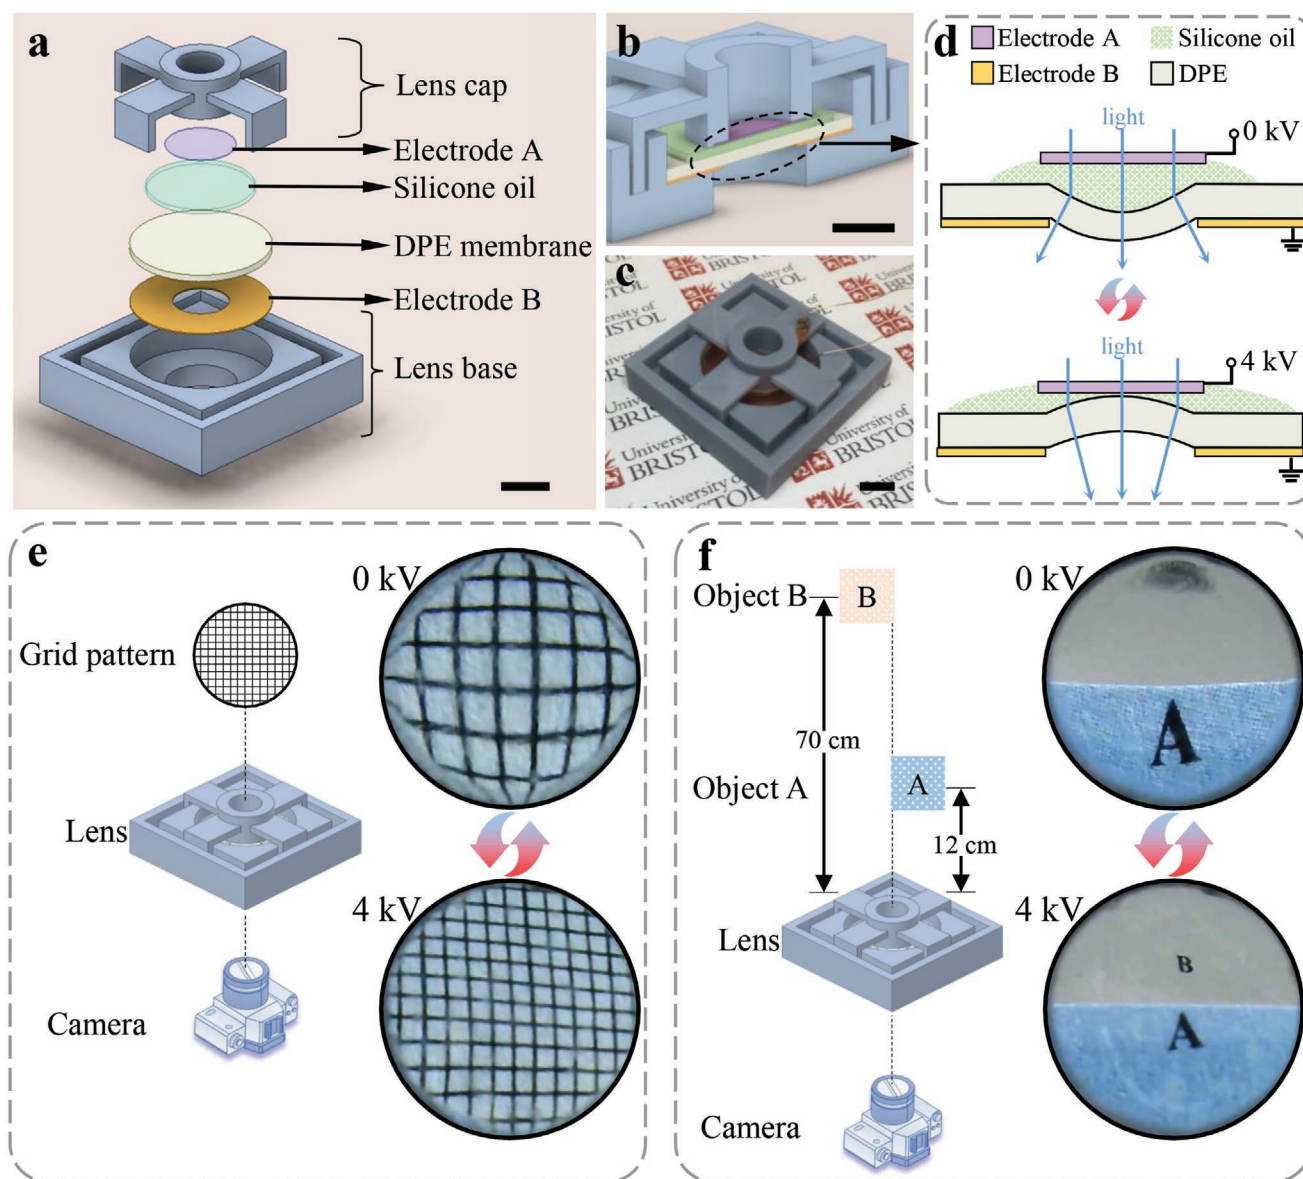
Design, mechanism, and demonstration of the DPE actuator as an optical lens with tunable focus. a) Exploded view and b) section view of a CAD model of the optical lens. c) A photograph of the DPE tunable lens. d) Working principle of the lens. e) Left: illustration of the active lens control setup, observing a grid pattern. Right: Images at rest state (top) and under voltage activation (bottom). The image shift from top to bottom takes ≈ 16 s. f) Left: Diagram of active focus adjustment, observing two objects at different distances. Right: Images of focus change from Object A at rest state (top) to Object B under voltage activation (bottom). The image shift from top to bottom takes ≈ 16 s. The accompanying videos of demonstration in e) and f) are available in Video S5 (Supporting Information). Scale bars in a), b), and c) represent 1 cm.
